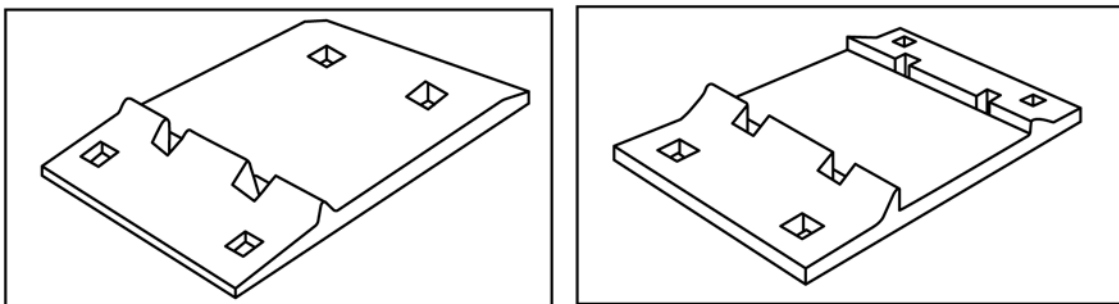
Single Shoulder Tie Plate and Double Shoulder Tie Plate
